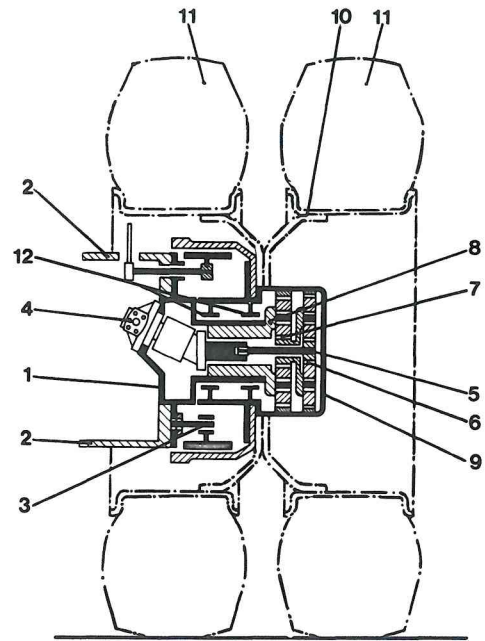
Wheelmotor transmission. Key: 1, casing; 2, vehicle chassis; 3, road brake; 4, hydraulic motor; 5, drive shaft; 6, first planetary stage; 7, second planetary stage; 8, axle journal; 9, hub; 10, rim; 11, twin tires; 12, roller bearing. (Courtesy of American Lohmann Corporation, Hillside, N.J.)
